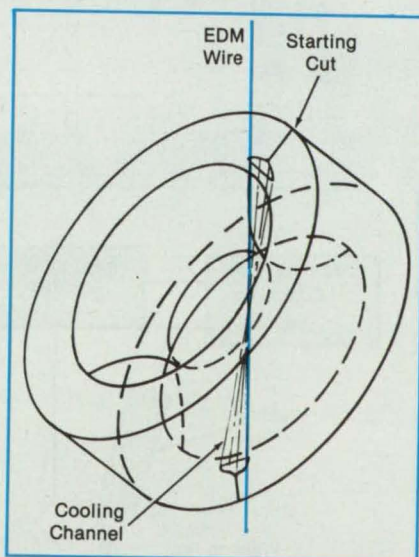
Maintaining the Same Skew Angle as that used to cut the hyperboloidal inner surface but using a larger offset, a cooling channel is cut in the material near the inner hyperboloidal surface.
